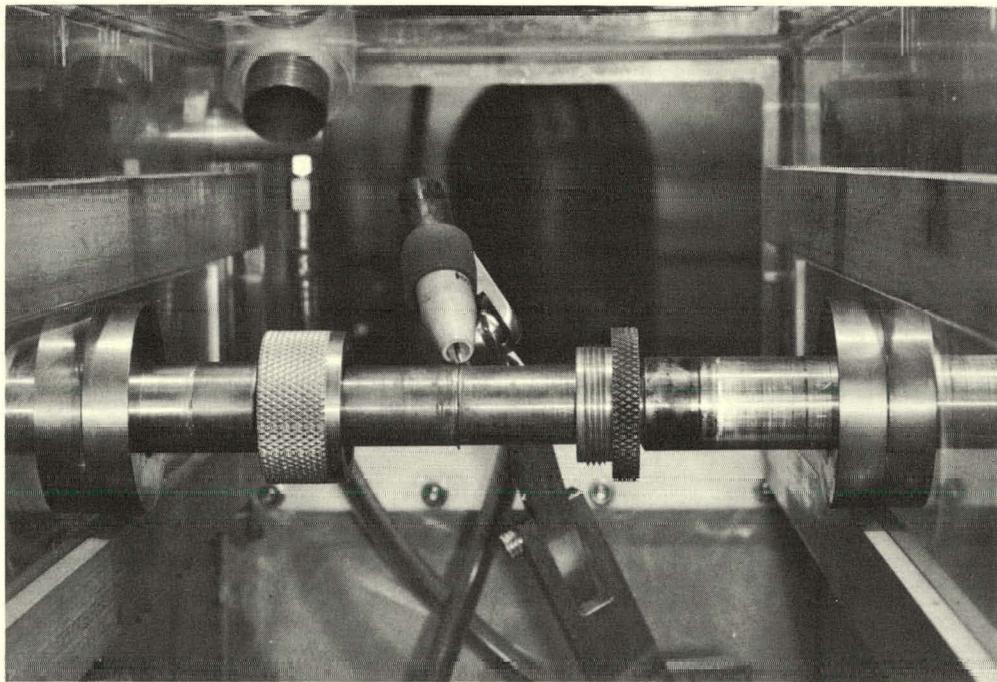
Inside view of dry box, showing positioning and holding fixture and welding tip.
